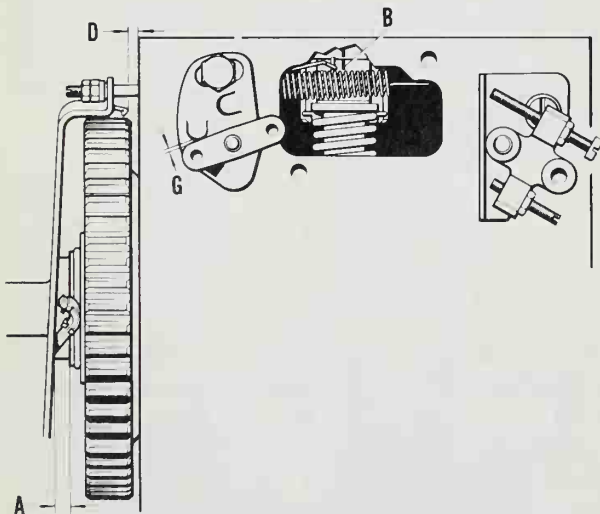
To check or adjust fuel pump and governor, remove fuel pump inspection door and gear cover. Set distance (A) to 5.0 mm and align calibration mark (B). Governor lever stop to crankcase clearance (D) is 6.0-8.0 mm. Refer to text for details and values of (G).
